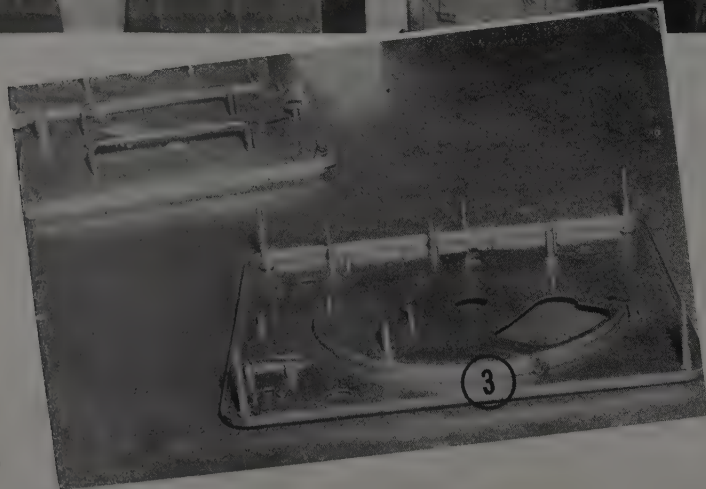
All 26 studs and clips of varying sizes welded into place on record changer panel in foreground. In background is jig of type used to load studs and clips into the spotwelding machine
